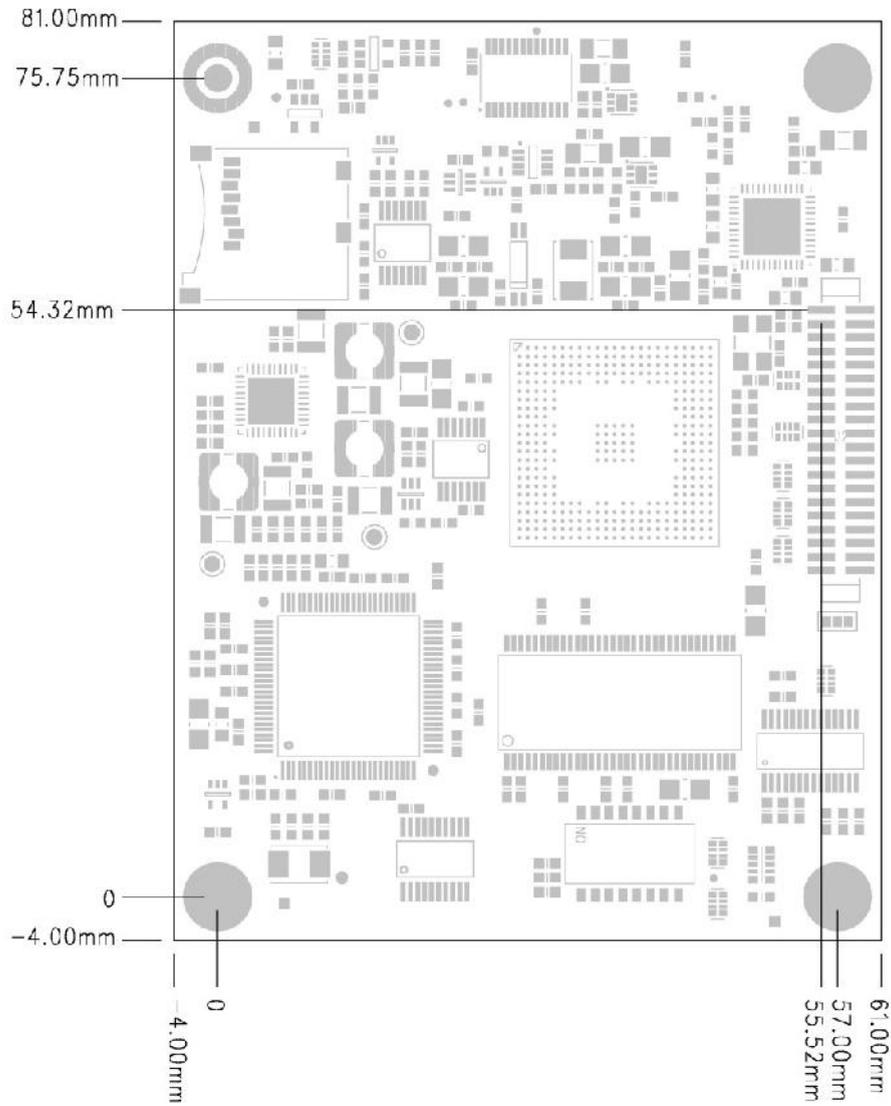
TOP SIDE CONNECTOR POSITIONS
